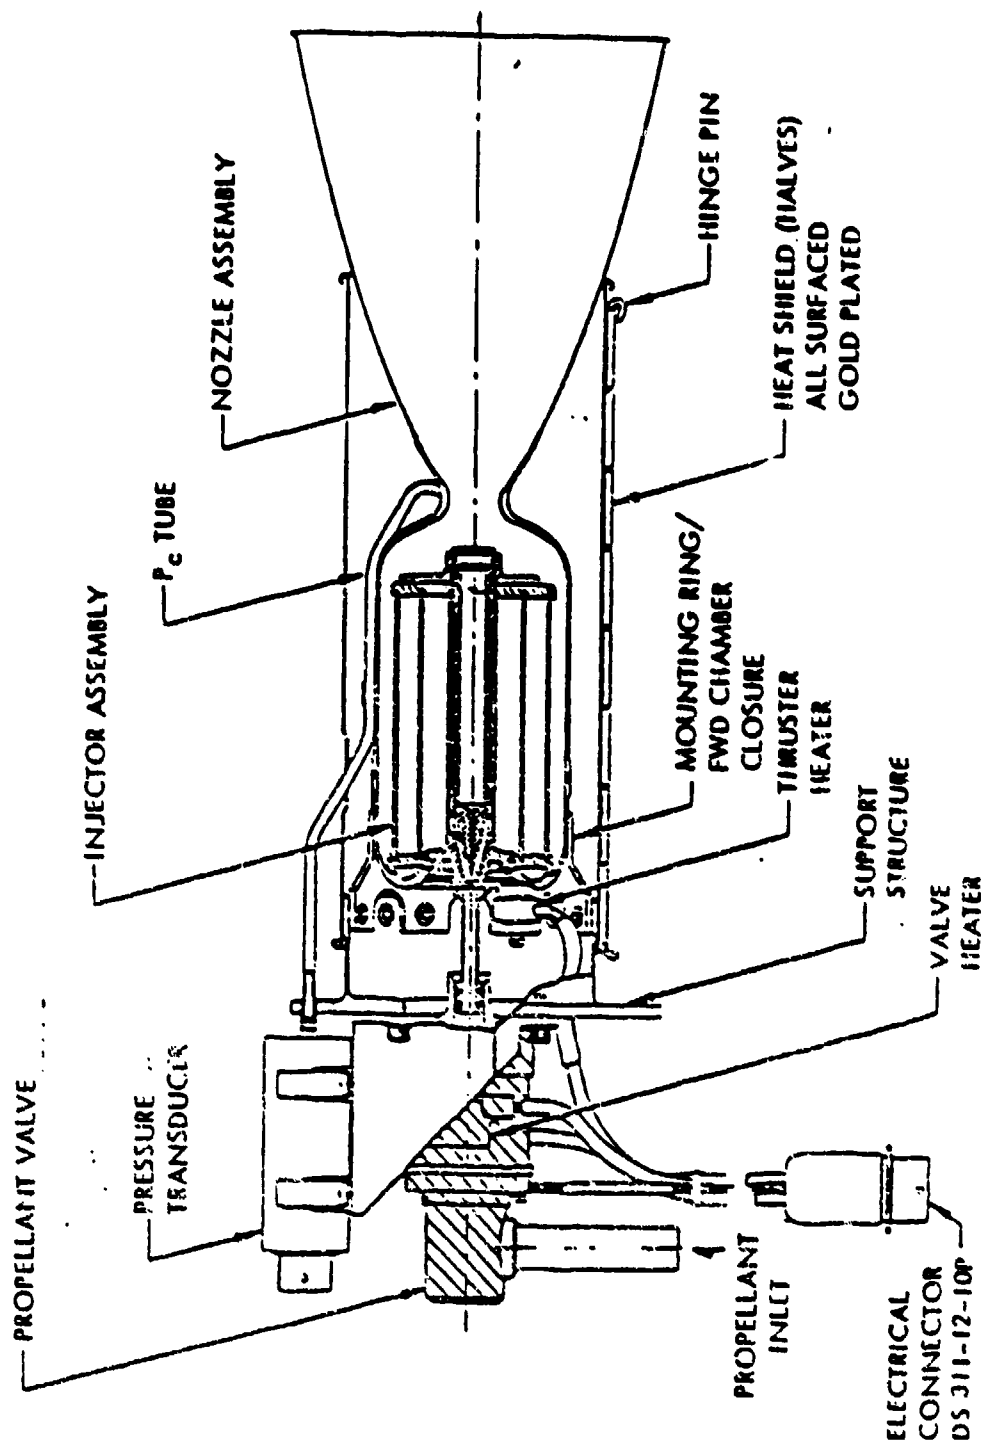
Rocket Engine Assembly - MJS 100 LBf
